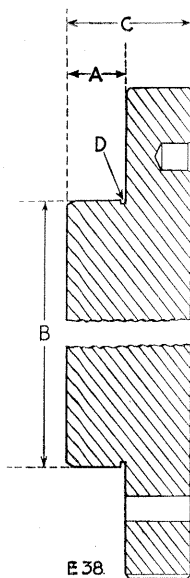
Machining flywheel for ring gear (Diesel models)
